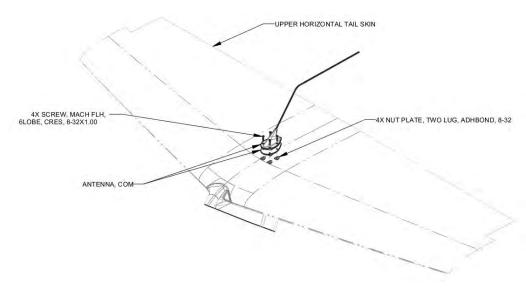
COMM ANTENNA – EXPLODED VIEW
